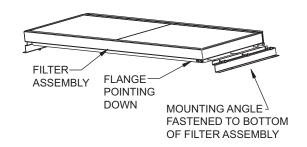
Correctly Assembled Bottom Filter Assembly (Sizes 020-035 Only)
